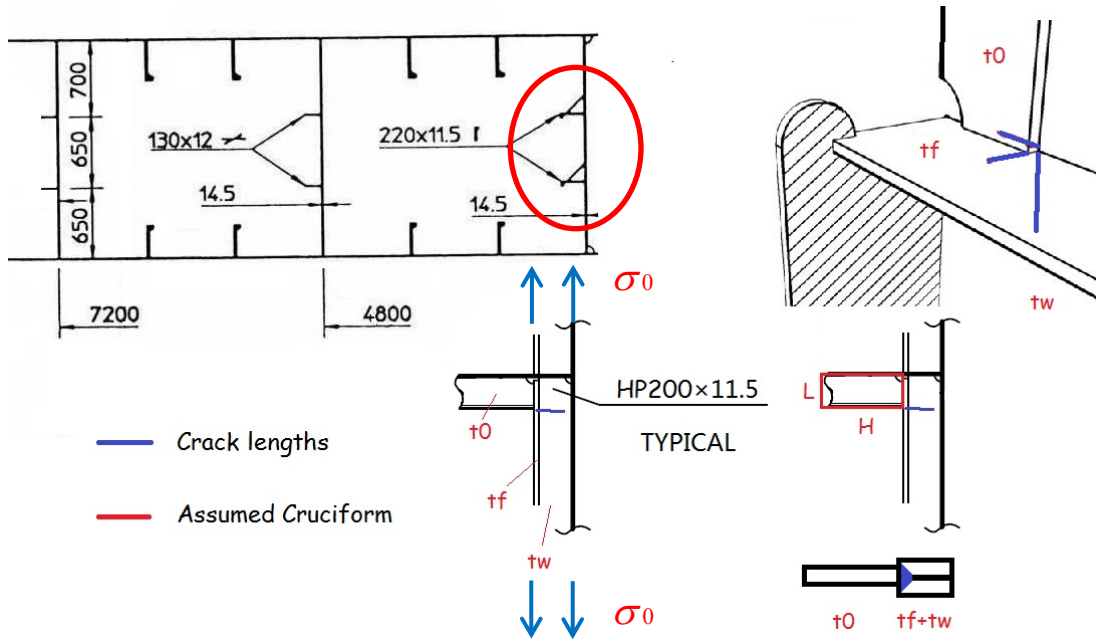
Situation I of Cracks at the Connections of Centre line/side Girder
